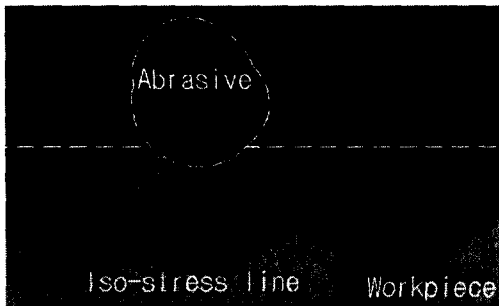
Photograph of material removal by Hammering(Glass, Side view, 50X)
